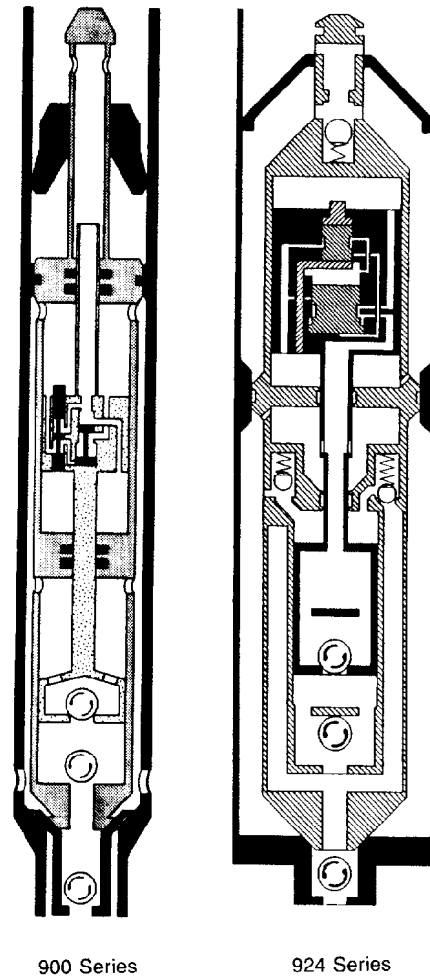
Manufacturer "D" pump types for Table 6.4.
